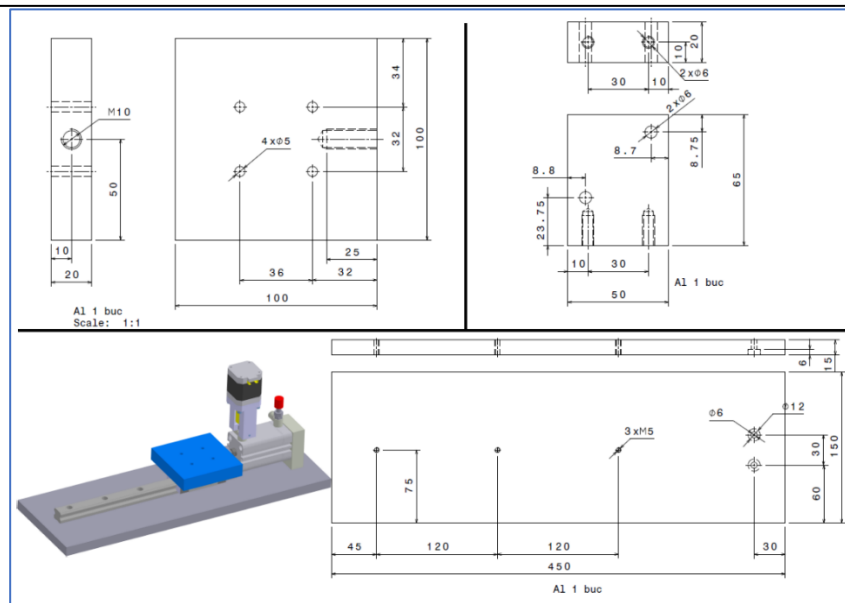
Execution drawings for mounting plates made in CATIA
